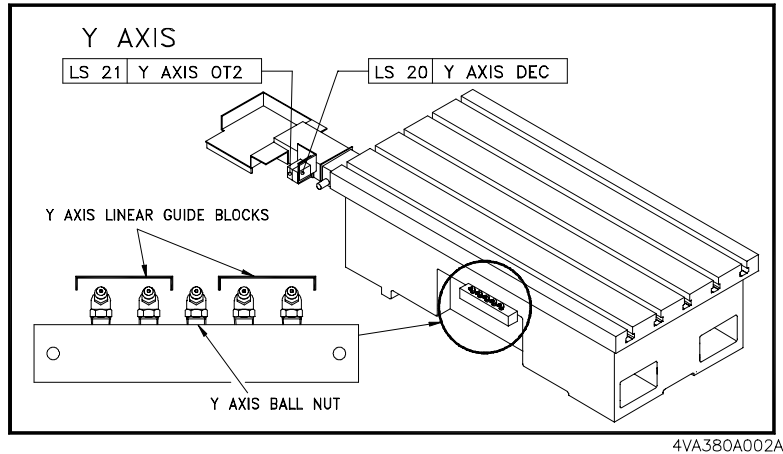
Y LM GUIDE AND BALL NUT LUBRICATION POINTS
